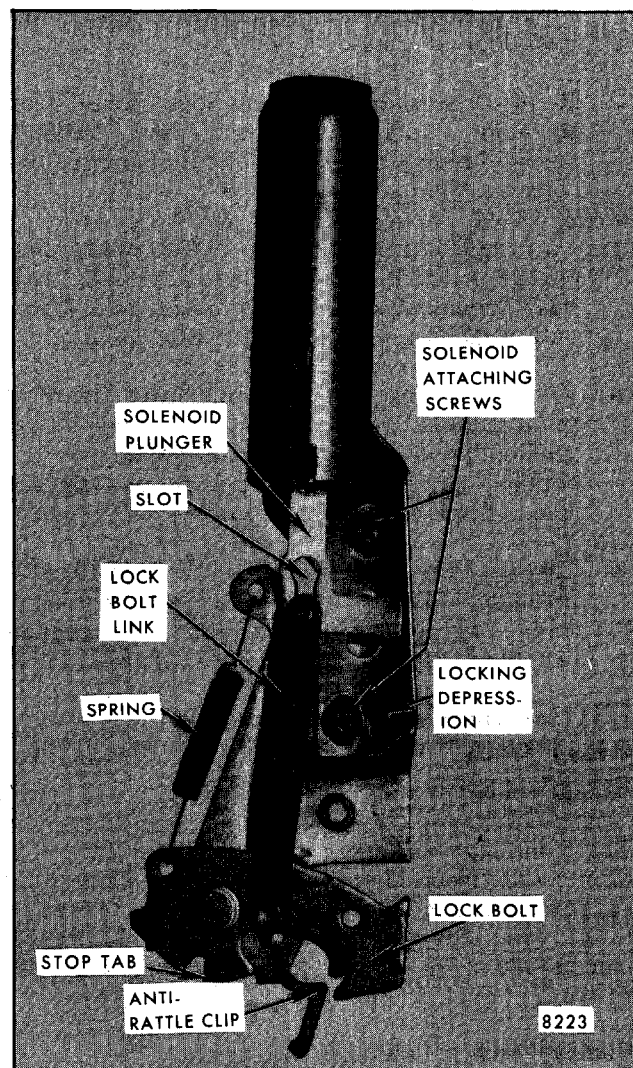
Front Seat Back Electric Lock Solenoid and Support Assembly - All Two-Door Styles with Notch Back Bench, 60-40 or 50-50 Seats
